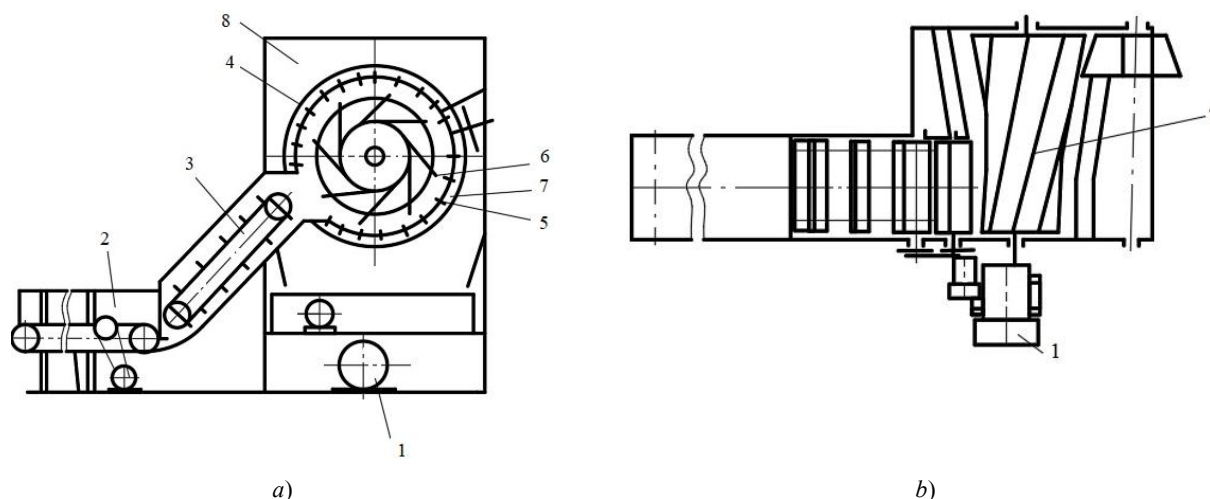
Diagram of the stand equipped with threshing and separating unit: side view (a); top view (b)
